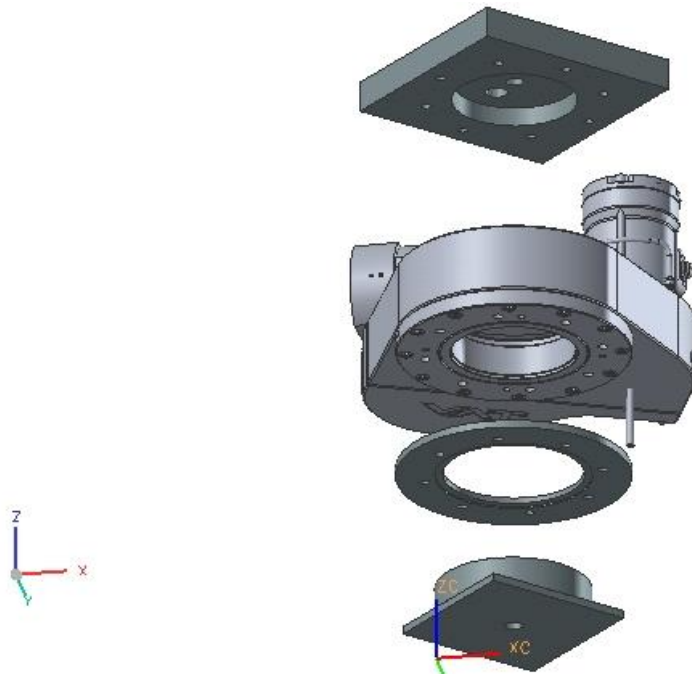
(a): Bottom View of Explosion of Recommended Final Design
